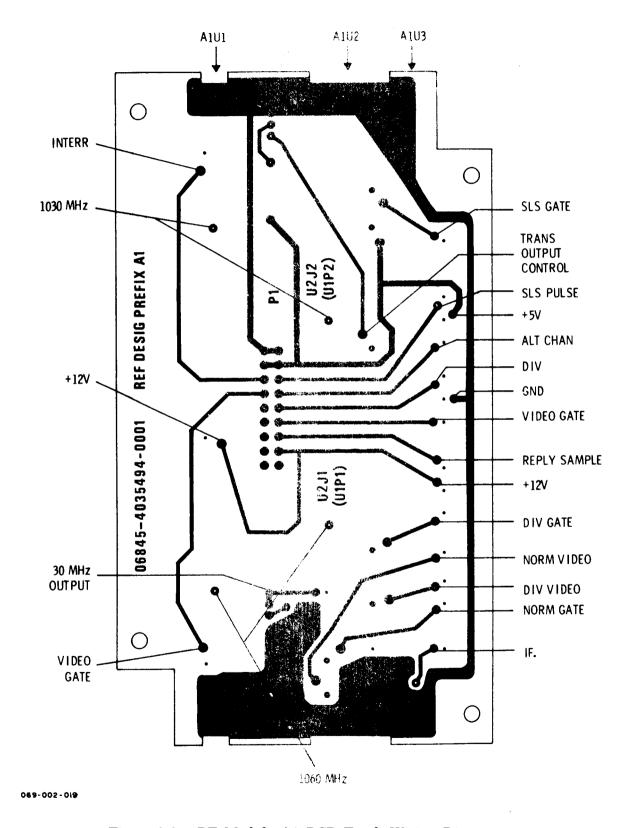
RF Module A1 PCB Track Wiring Diagram
